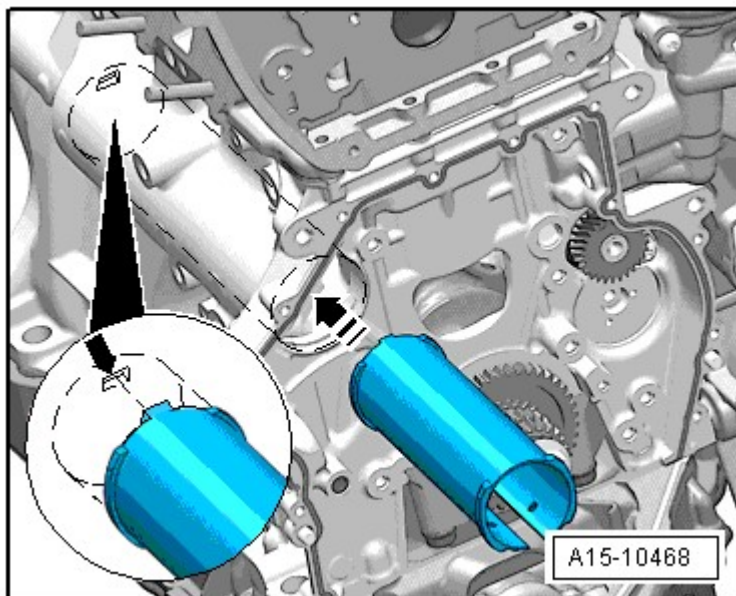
Identifying Pipe For Balance Shaft - Installation Position
